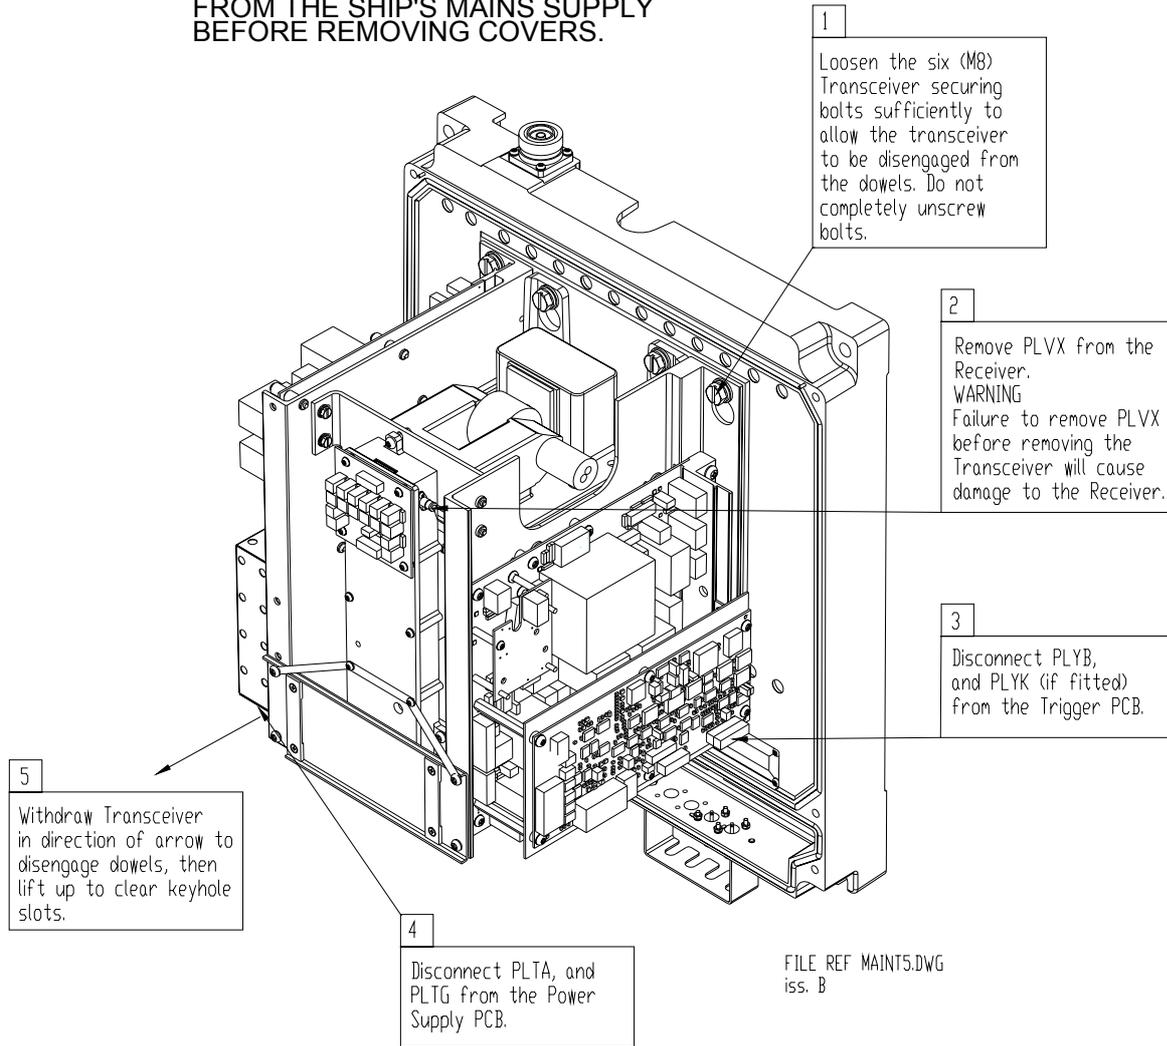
Removing Transceiver Assembly 65830630 (Bulkhead Transceiver)
